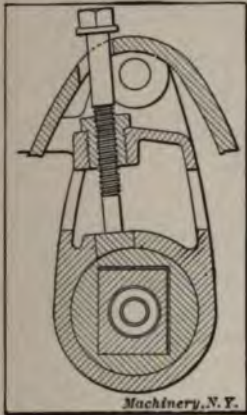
Set-screw with Shoe for Clamping Sleeve
